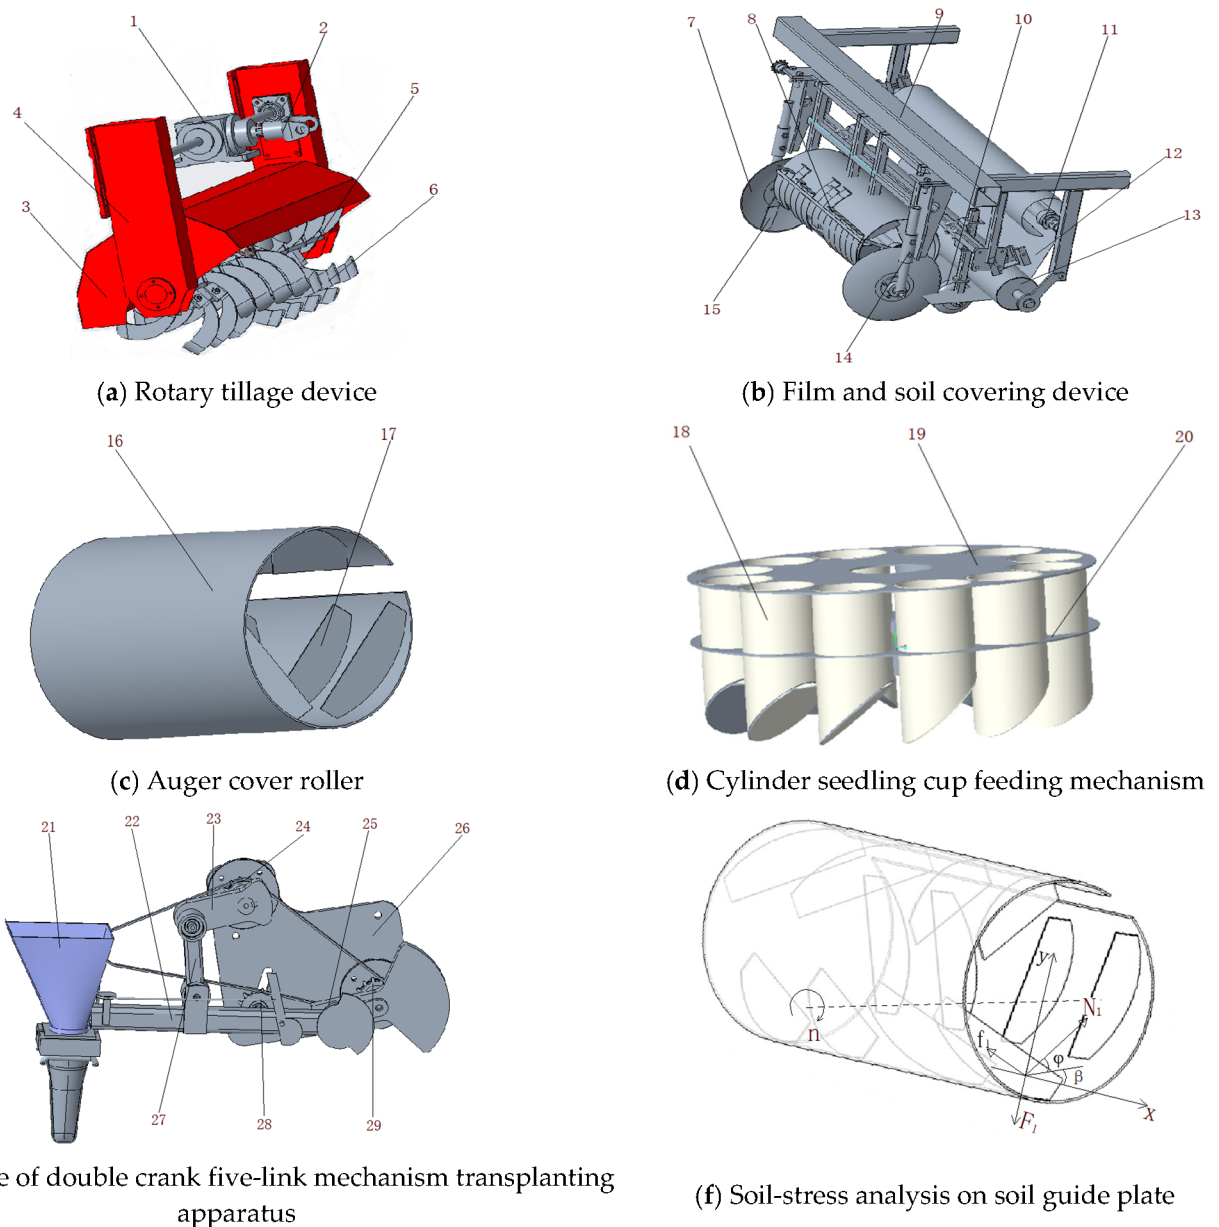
Key mechanisms of the transplanter. 1. Transmission case; 2. Power transmission shaft; 3. Trim shell of rotary tillage device; 4. Transmission housing; 5. Rotary blade shaft; 6. Rotary blade; 7. soil-covered plate; 8. Auger cover roller; 9. The shelf of film and soil covering device; 10. Film-pressure wheel; 11. Film roller suspension rack; 12. Film; 13. Film roller; 14. Installation support; 15. Soil-retaining plate; 16. The shell of auger cover roller; 17. Soil guide plate; 18. Seedlings cup; 19. Turntable plate; 20. Seedlings cup bracket; 21. Duckbilled transplanting apparatus; 22. Coupler-1; 23. Crank-1; 24. Gear-1; 25. Crank-2; 26. Connection plate; 27. Coupler-2; 28. Gear-2; 29. Gear-3.
